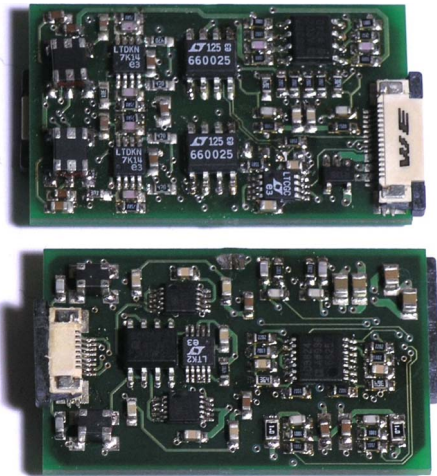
Prototype PCB implementation of the proposed self-sensing circuit, top and bottom views. Dimensions: $22.5 \times 38 \times 6.5 \text{ mm}^3$.
